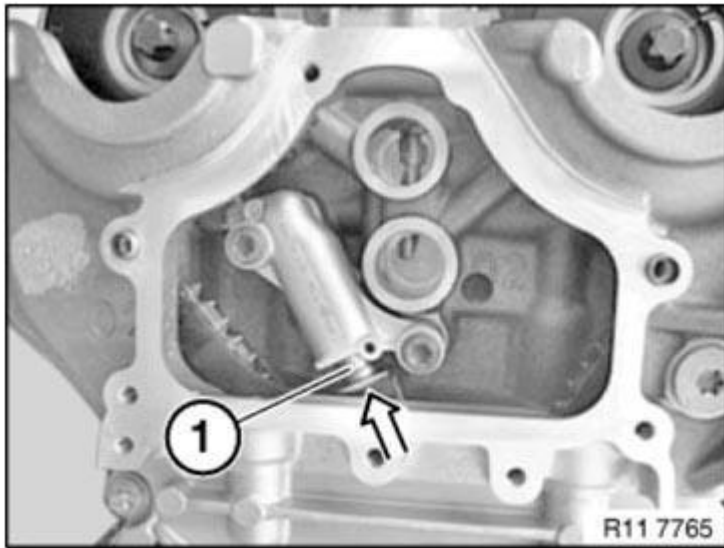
Identifying Piston Of Chain Tensioner Pressed In Against Oil Pressure In Housing
